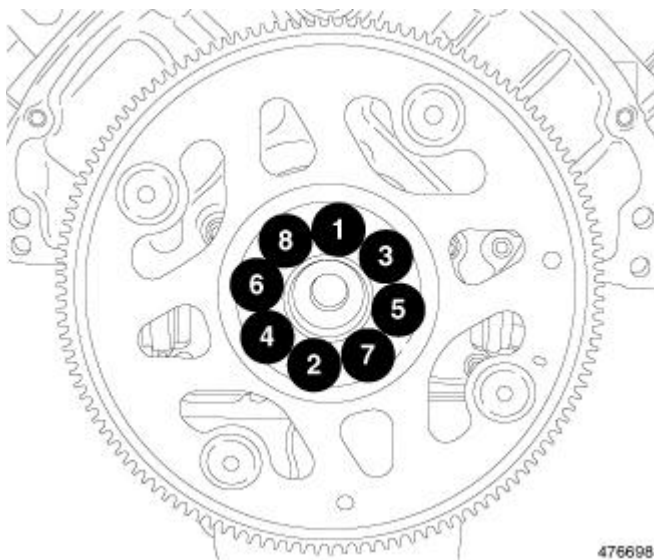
Flexplate Retaining Bolt Removal & Tightening Sequence
